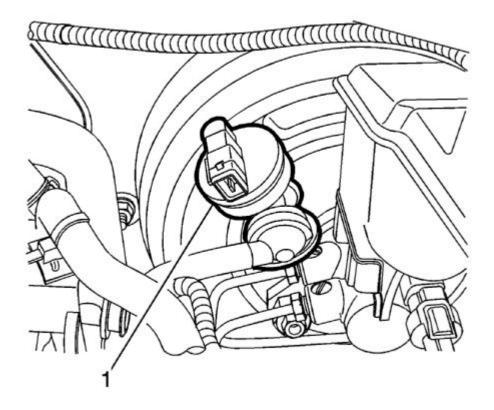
Electrical Vacuum Pump Courtesy of GENERAL MOTORS COMPANY
